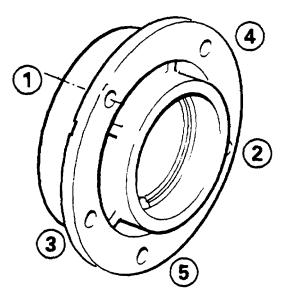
Bearing Housing Capscrew Tightening Sequence
